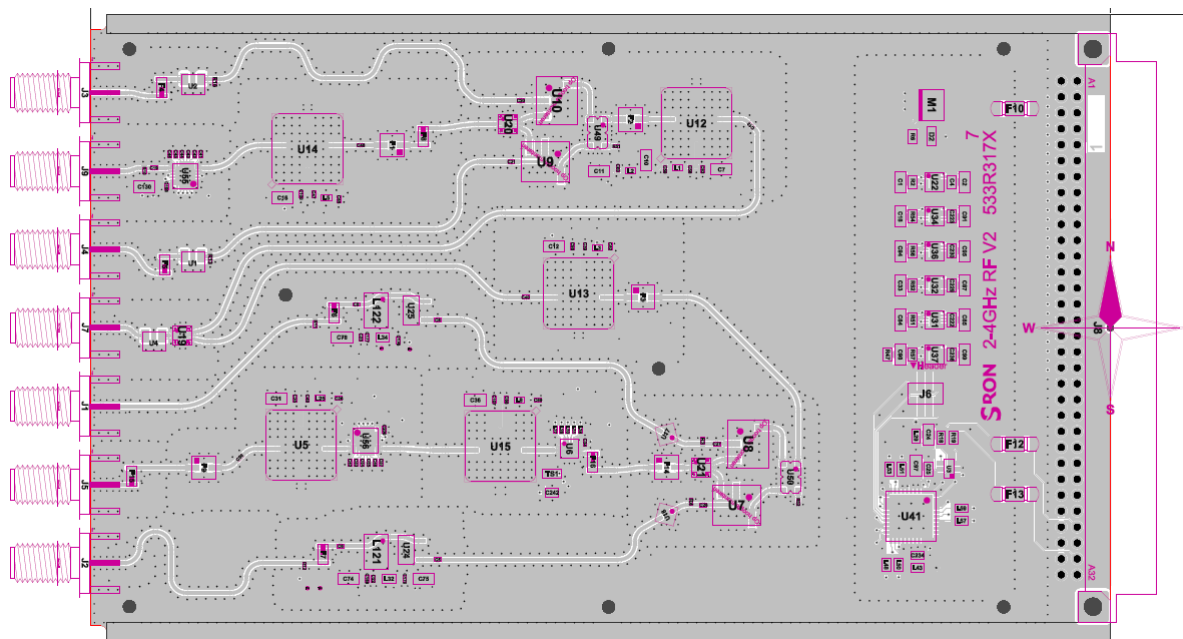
The PCB layout showing the components, traces and screw holes.
